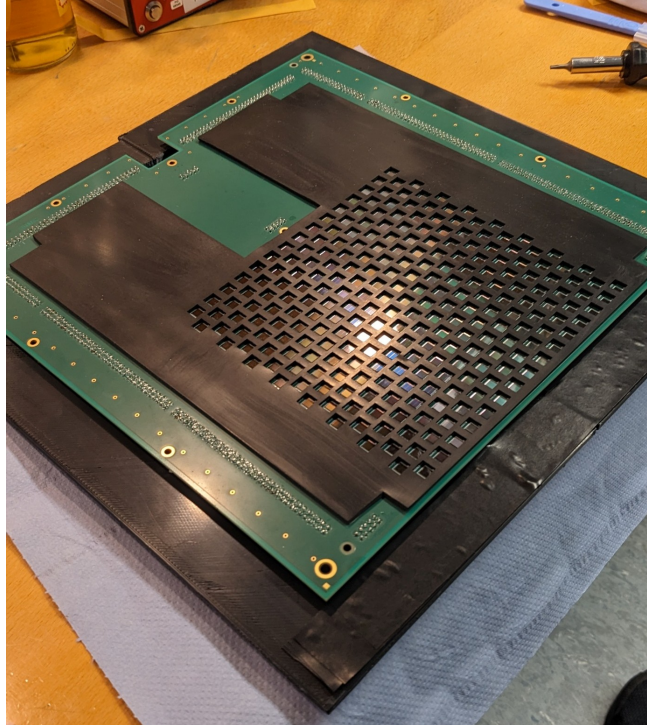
Readout PCB with the rubber spacing mask attached.
